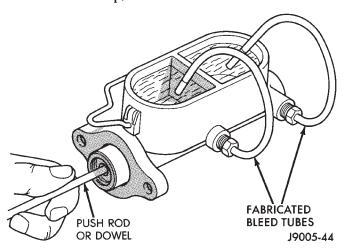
Typical Method Of Bleeding Master Cylinder (One-Piece Cylinder Shown)
